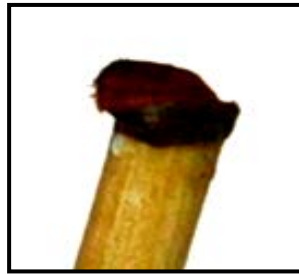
Groove Formed on the Top to Accept 4mm. Rod
